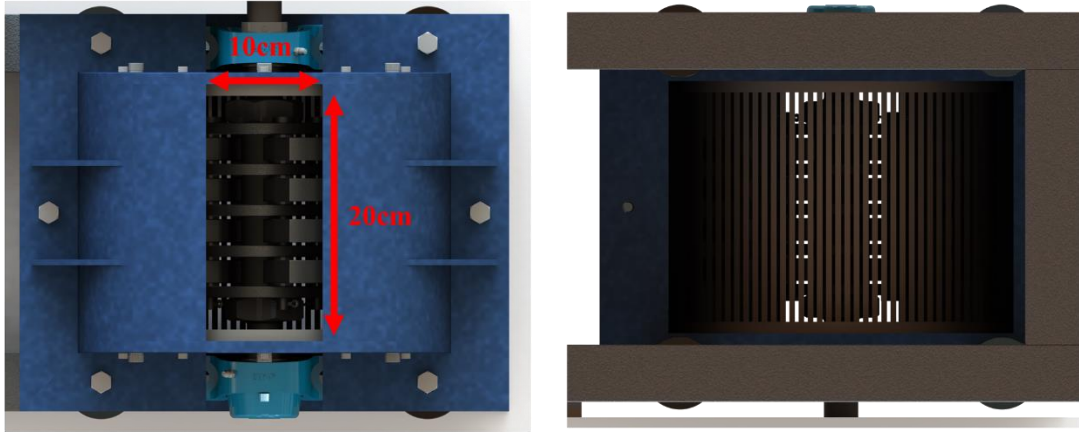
Top and Bottom view of the Hammer Mill Crusher showing the Max Input Size and the Screen
